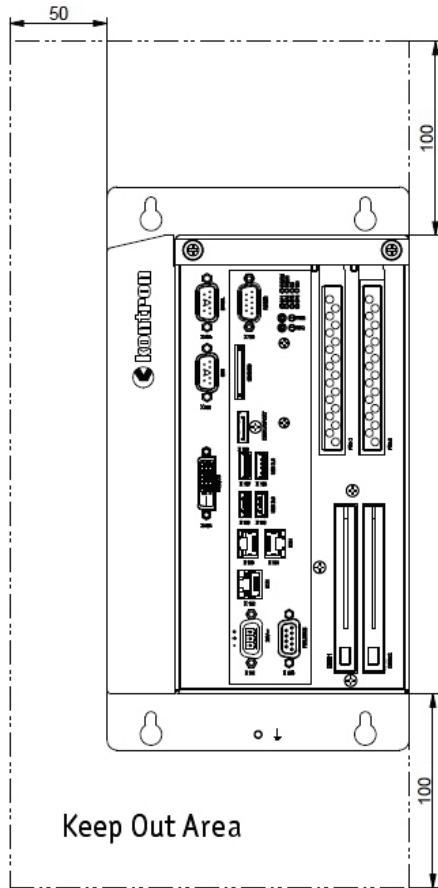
Keep out area for mounting around KBox C-102-2 (front side view with optional fan tray)
